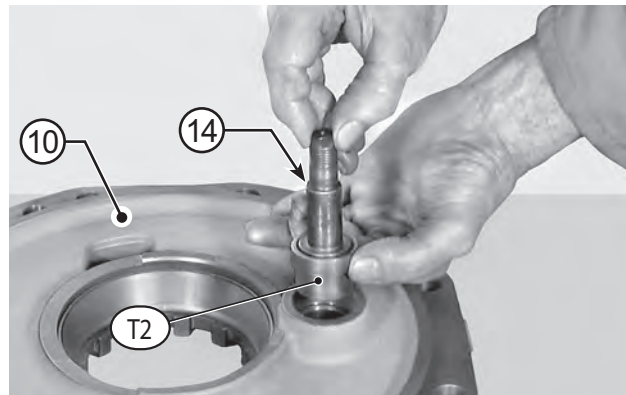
Place tool T2 (See drawing T2 p. 89) on the intermediate cover (10) and push piston (14) into its seat.
